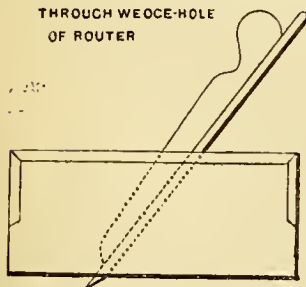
SIDE ELEVATION OF SMALLER ROUTER
